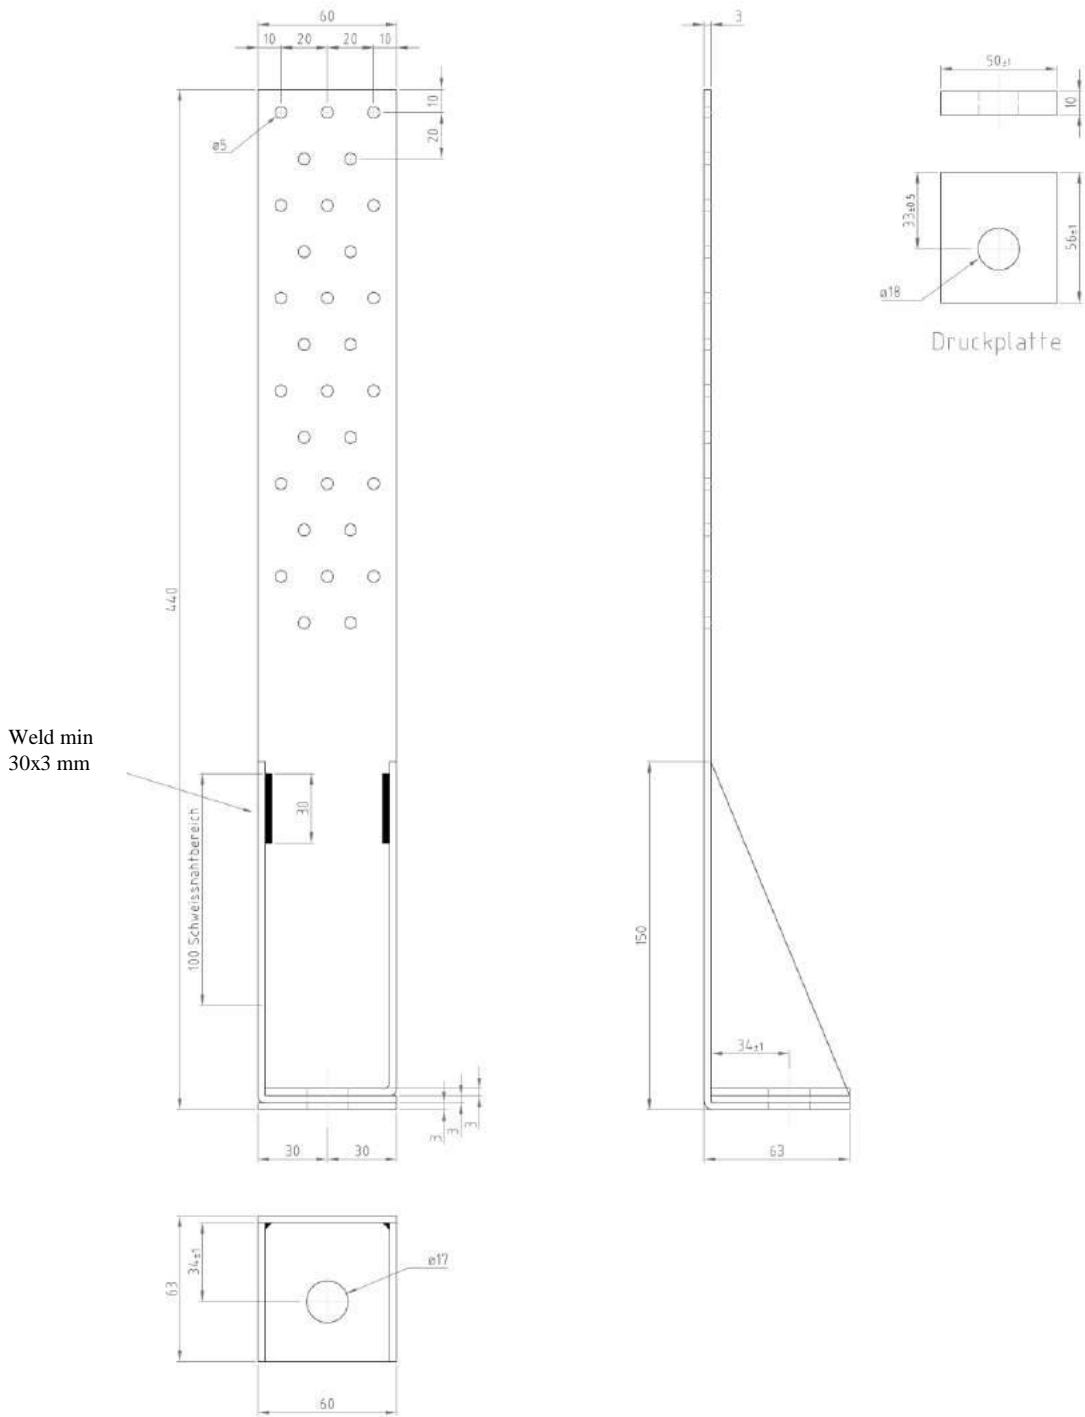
Dimensions of type WHT440 (drawing with washer 56x50x10)
